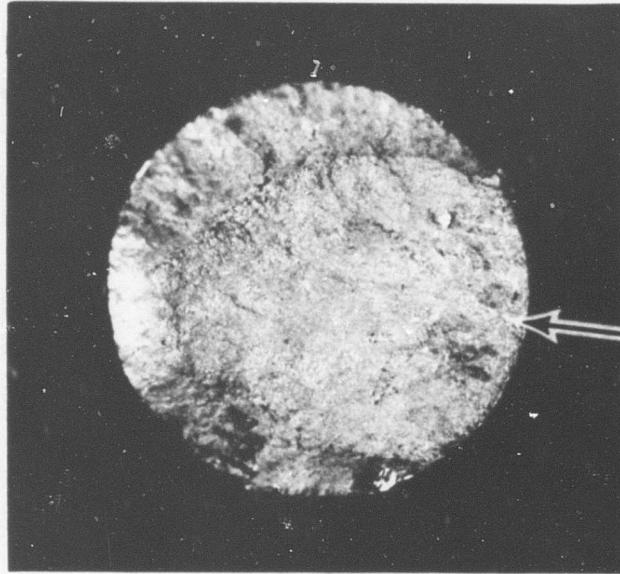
Fatigue Fracture Surface of Ti-6Al-6V-2Sn Axial Tension-Tension Fatigue Specimen.
